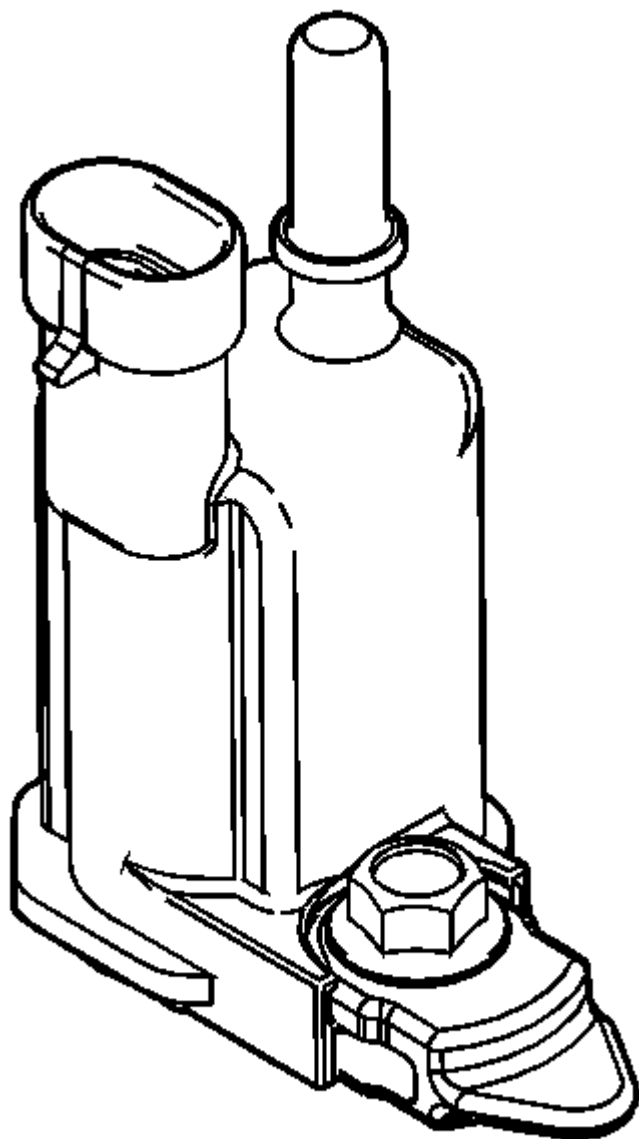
Identifying Correct EVAP Purge Valve Isolator Installation
